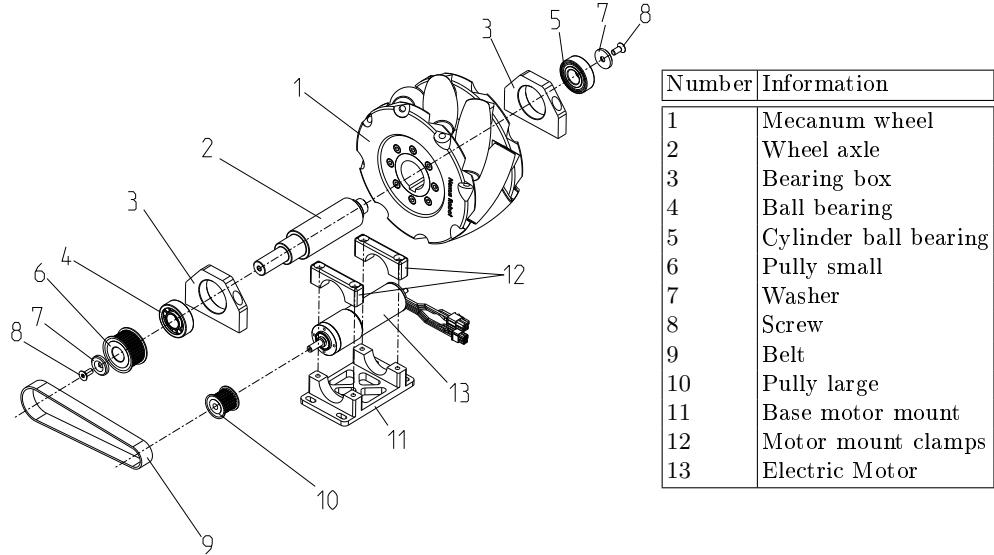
CAD design of drive-gear assembly group including mecanum wheel and timing-belt construction as explosion drawing.
